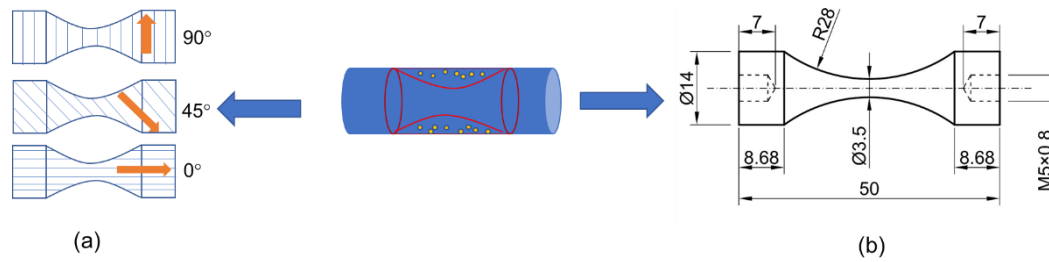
Specimen shape and dimension (a) and schematic drawing of specimens with different building orientations (b) for ultrasonic fatigue testing.
